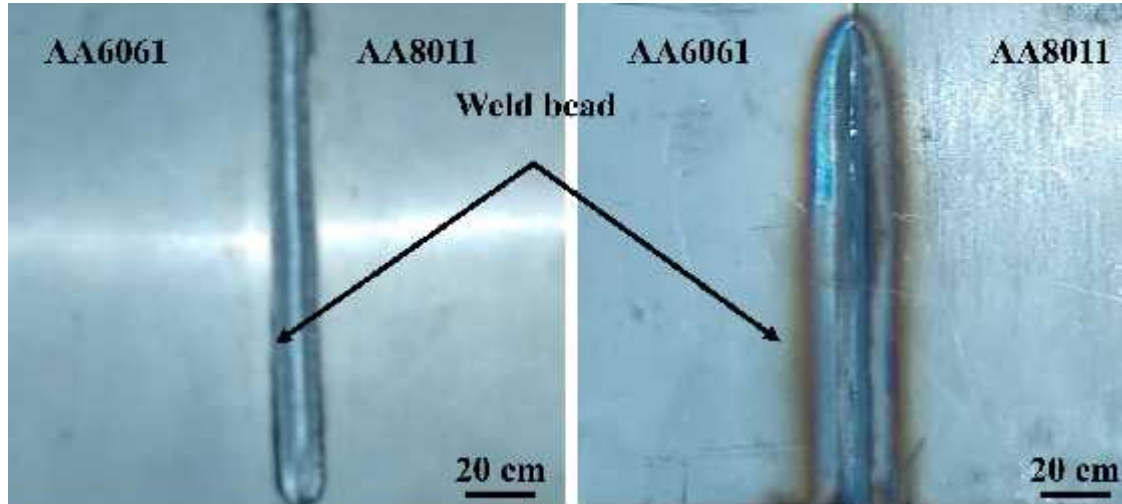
CMT welded joints of AA8011 and AA6061
